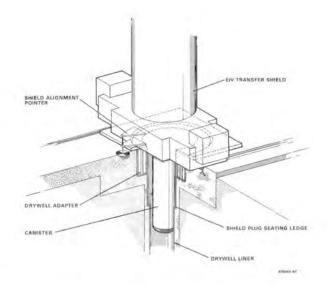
Transfer Shield, Drywell Adapter and Drywell Arrangement During Canister Emplacement
